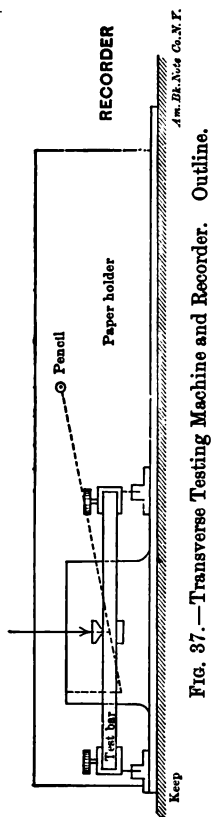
Transverse Testing Machine and Recorder. Outline.
